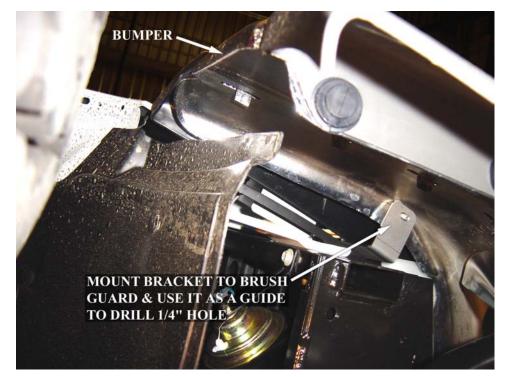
(3/4 & 1 ton only) Drill 1/4" hole, install 1/4" bolt and nut (passenger side).
